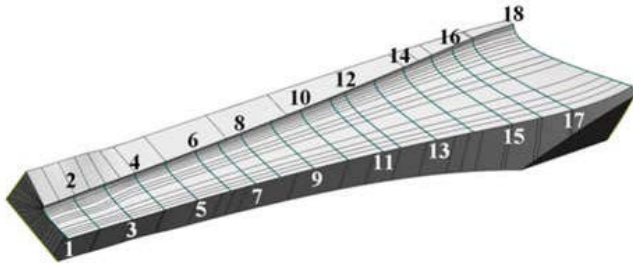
Nominal geometry of Mold Turbine Blade [8]
